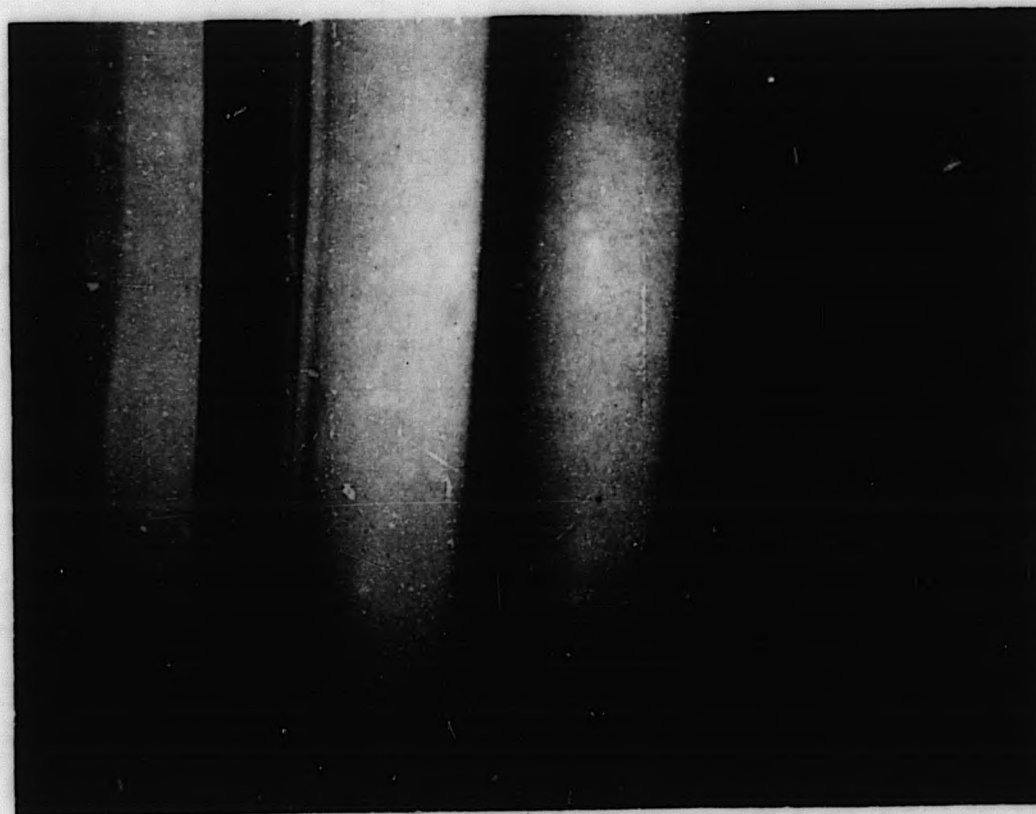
Wrinkled Fuel Rods in Assembly 8L
